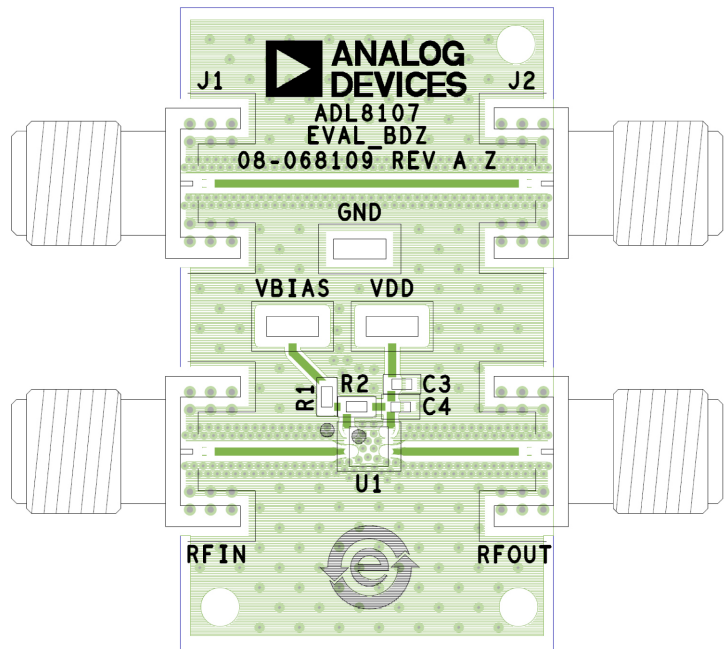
ADL8107-EVALZ Assembly Drawing (J1 and J2 Are Not Installed)
